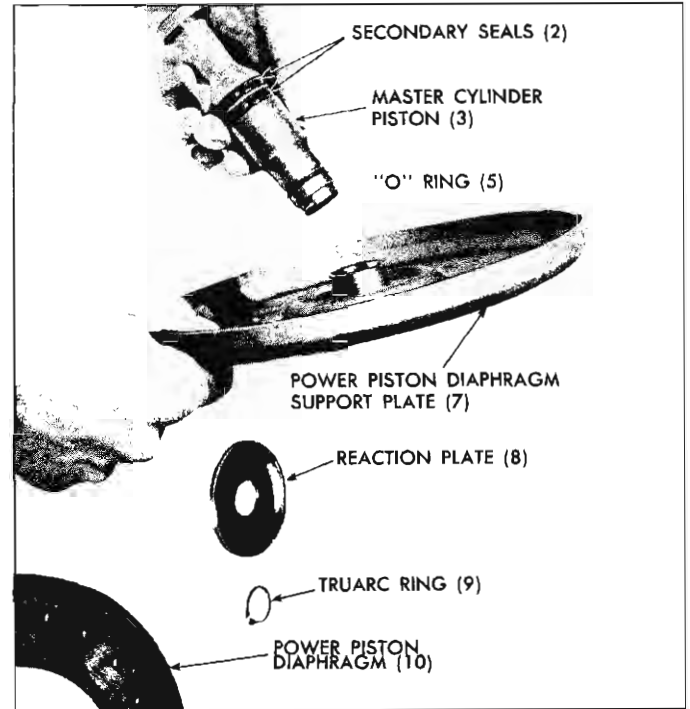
Master Cylinder Piston and Power Piston Diaphragm Support Plate Disassembly
